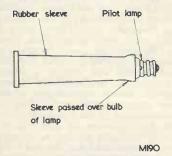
Awkwardly positioned pilot lamps may be readily fitted or removed with the aid of a rubber wire-grip sleeve
